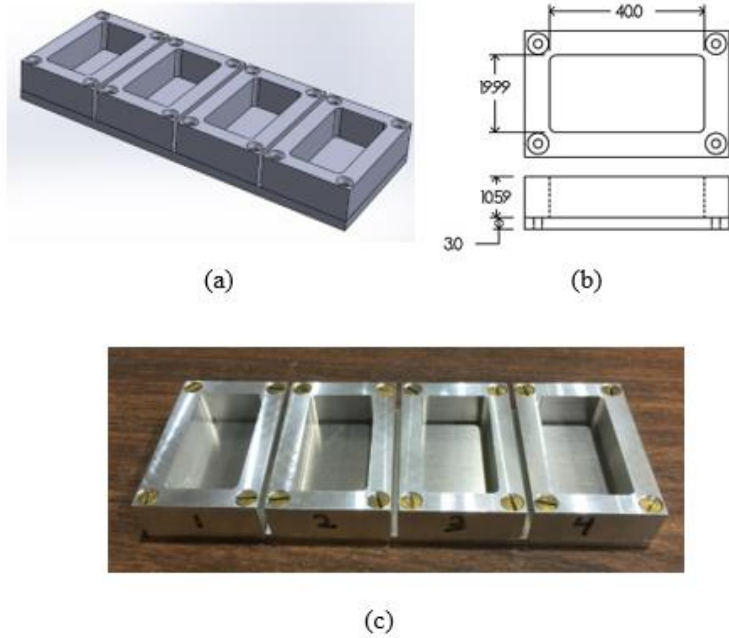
(a) Specimen's designed mold (b) Individual specimen's dimensions (in mm) (c) Final mold fabrication
